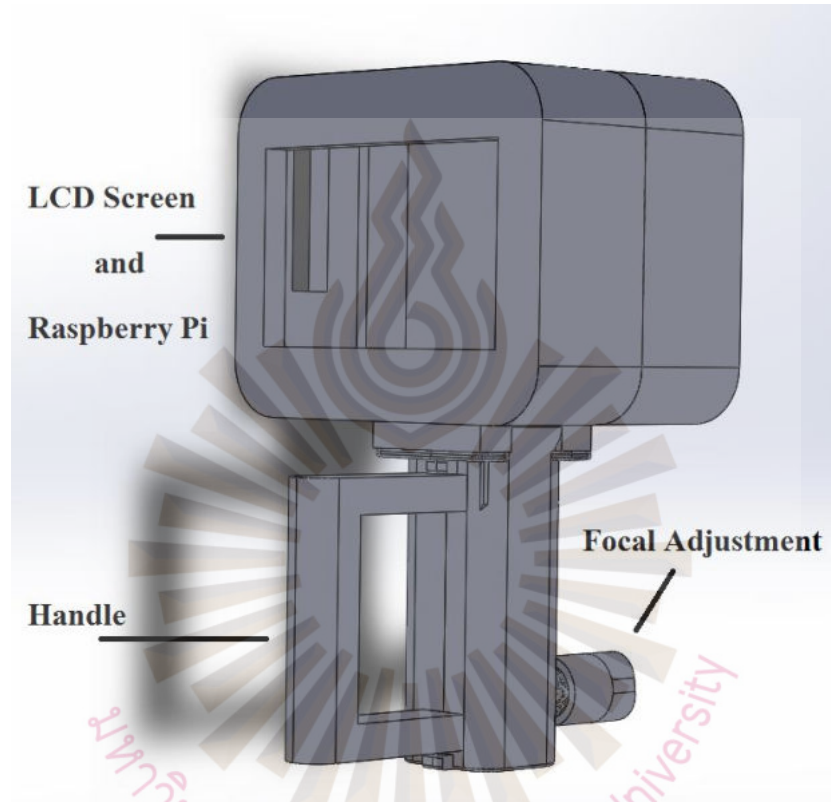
shows a 3D drawing of our proposed completed portable digital laryngoscope
